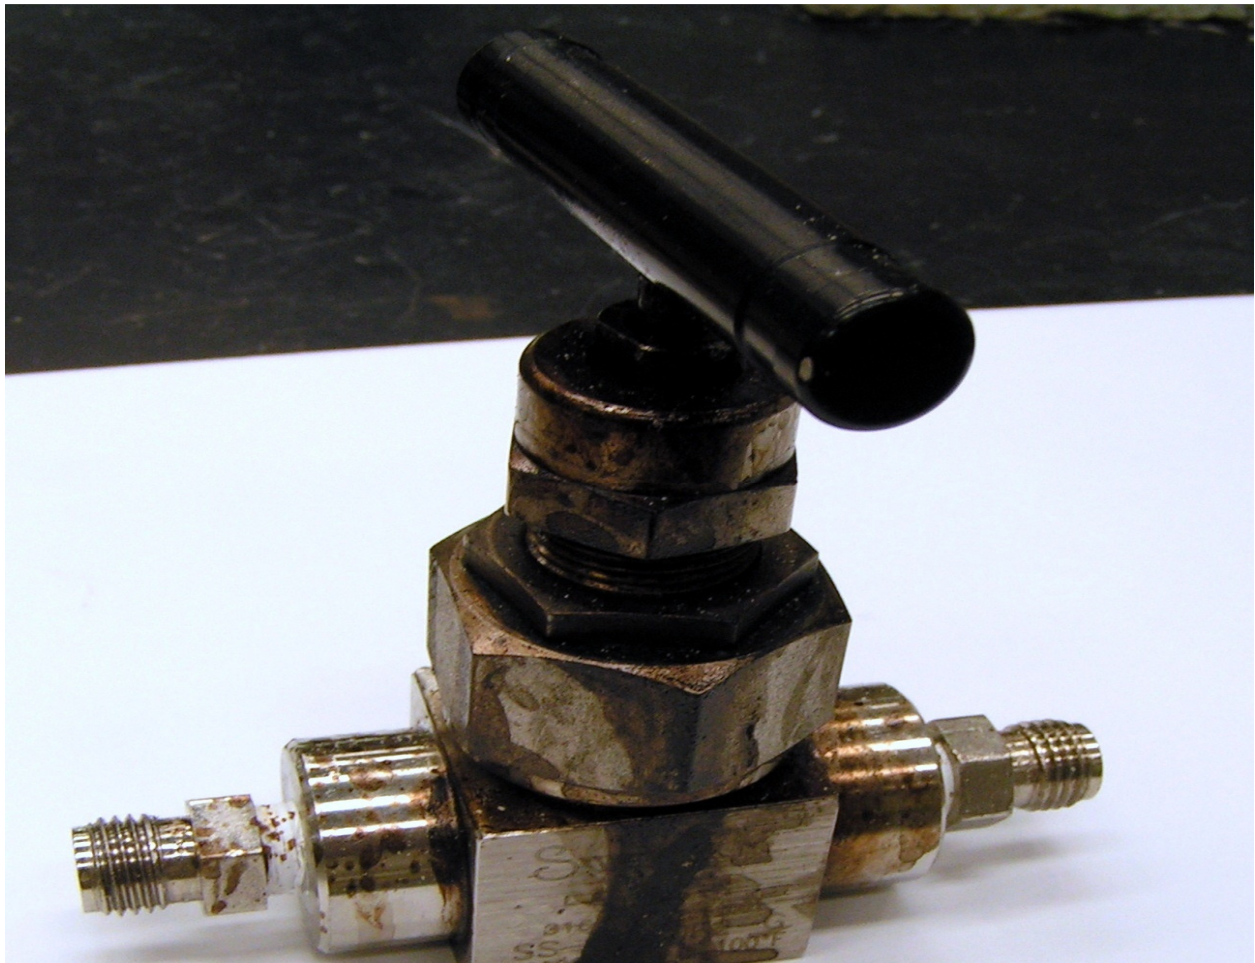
High pressure valve (10,000 psi) with ruptured internal seal.
